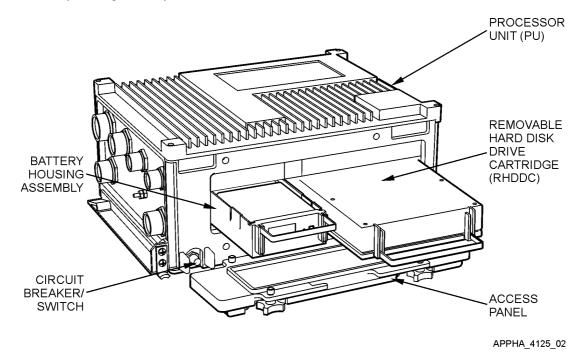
Remove/Replace Battery Housing Assembly For PU NSN 7021-01-474-3793/NSN 7021-01-487-0578
